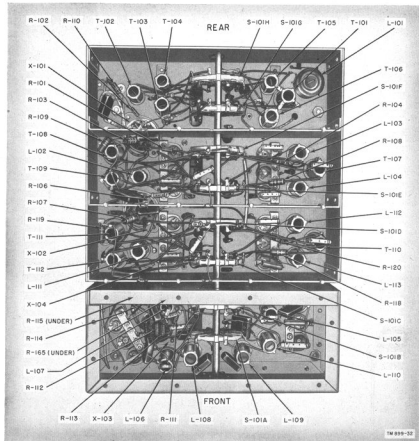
Radio Receiver R-320/FRC, bottom view of r-f chassis, showing additional components.
